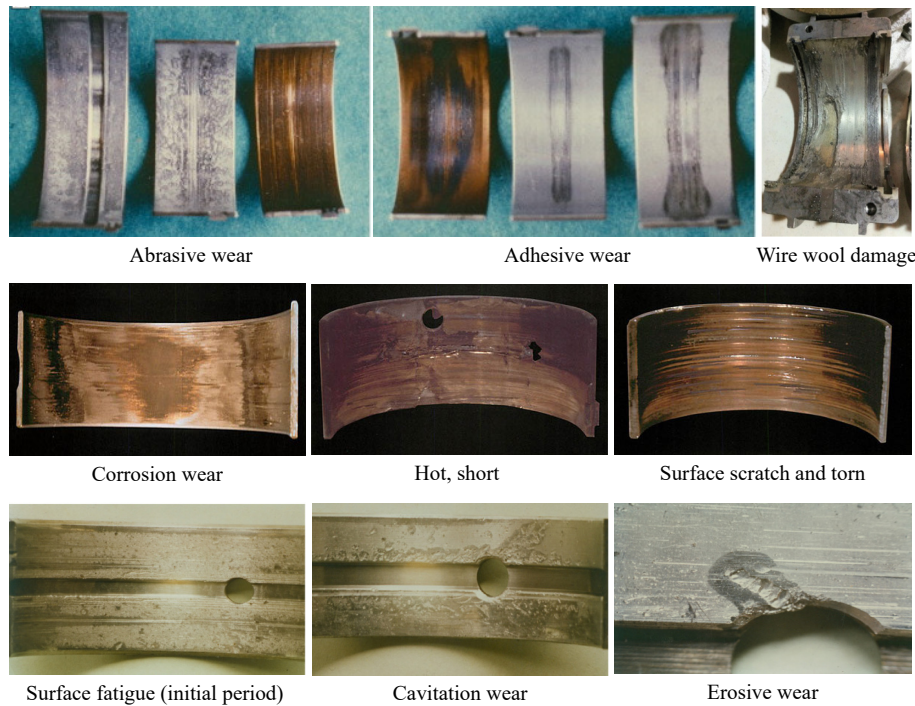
Failure forms of journal bearings. Reproduced with permission from Ref. [38] for (a), (b), and (h–j), © Elsevier Ltd. 2014.
